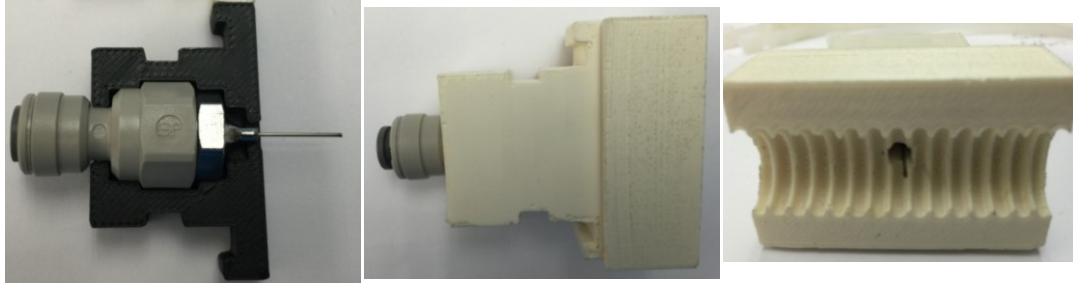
Needle Holder Design cross section (left), assembled (middle) and bottom (right)
